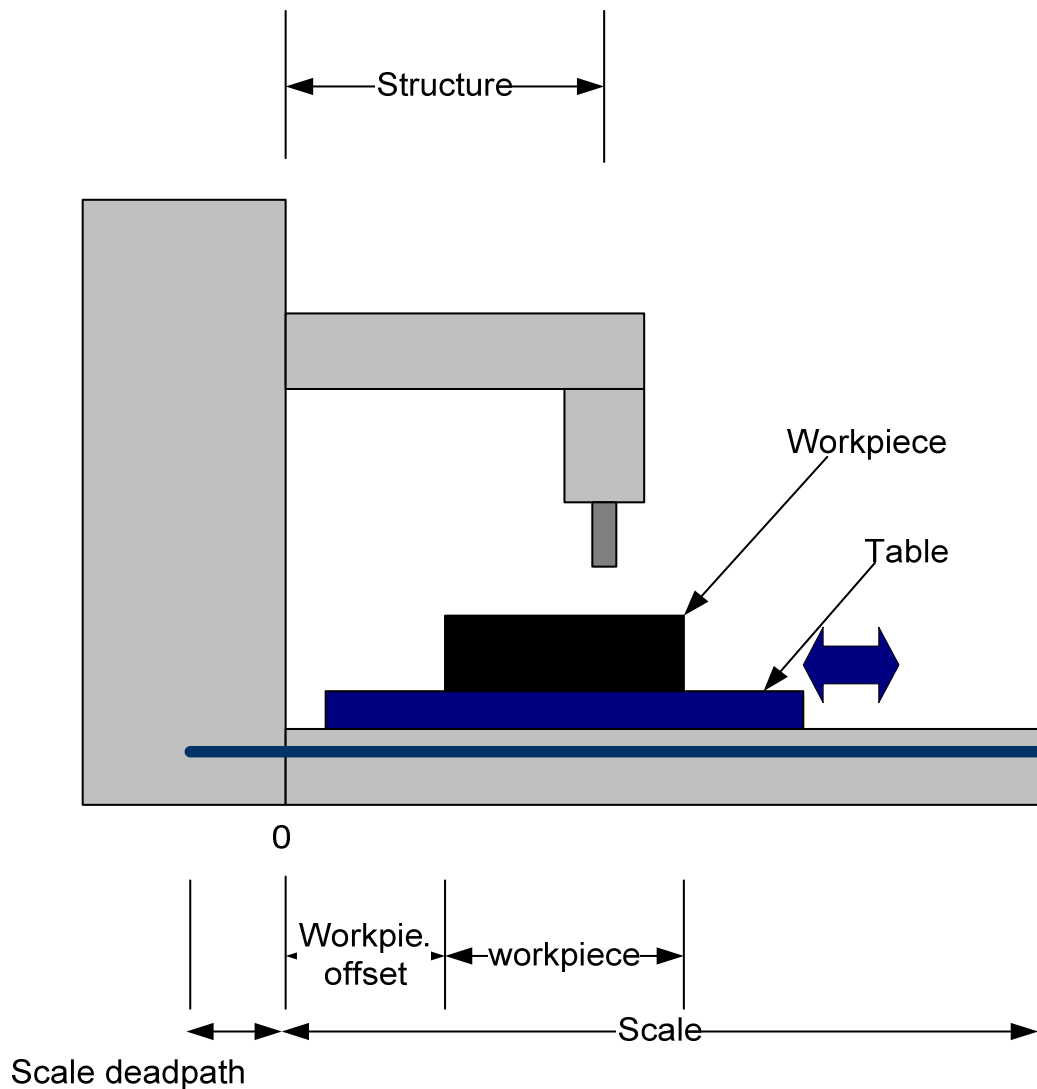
Illustration of the compensation mechanism of the ECU-01/02 used in a CNC machine
